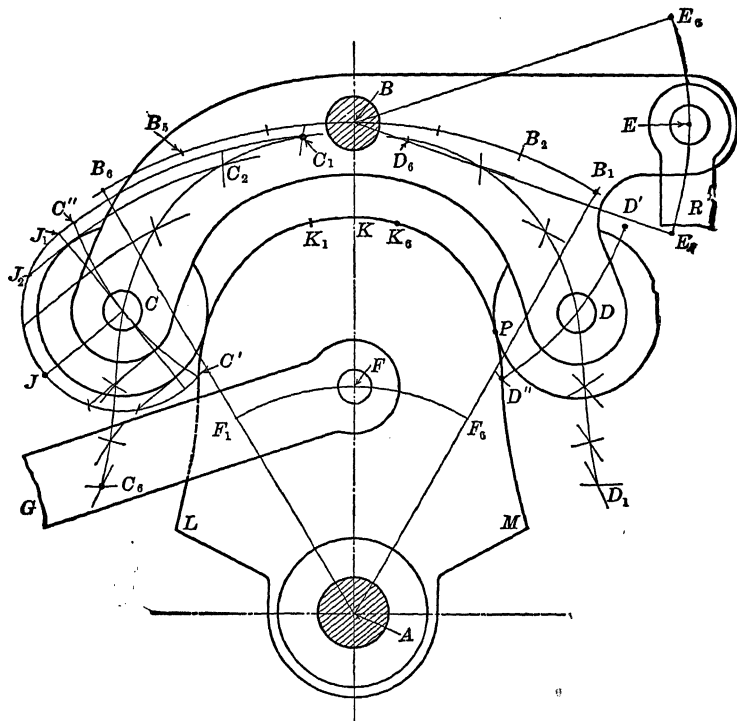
OSCILLATING POSITIVE DRIVE SINGLE DISK CAM
